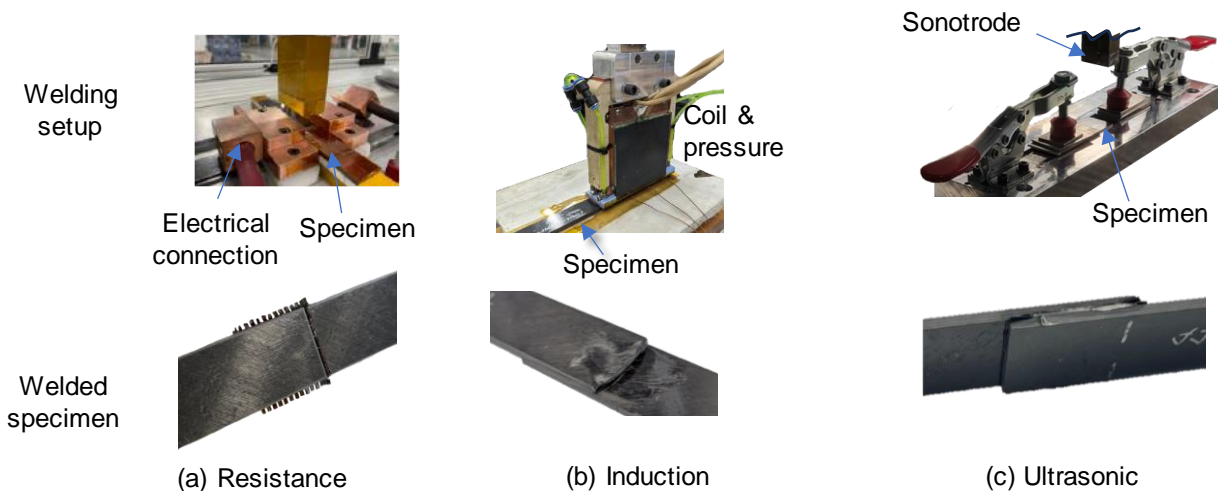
Summary of weldability study welding setups and photographs of welded specimens.
